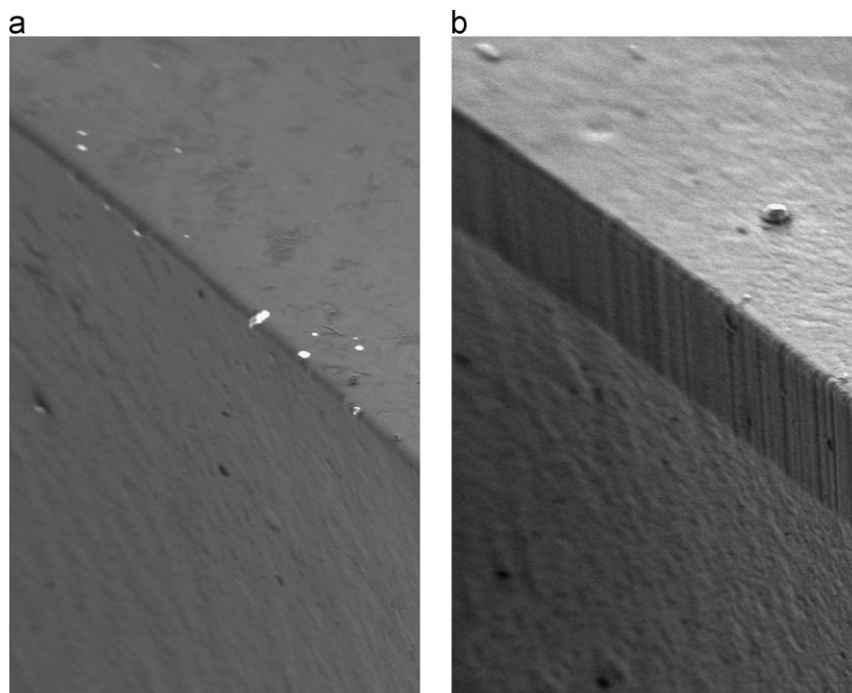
Two insert geometries investigated: (a) standard insert and (b) flank insert.
